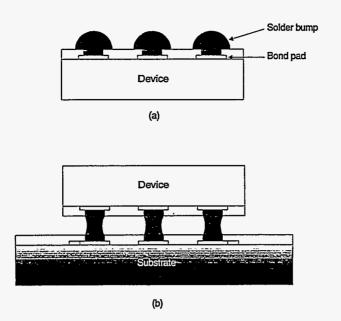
Illustration of flip-chip attach process. (a) Wetting of solder bump to bond pad. (b) Device to substrate attachment via solder reflow.
